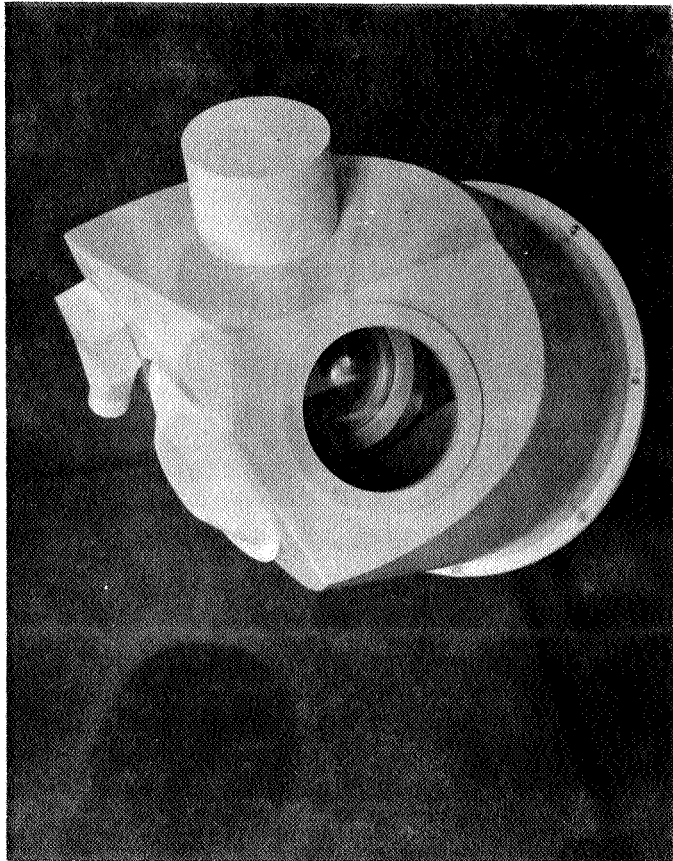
shows a full scale mock-up of the Mechanical Assembly. Figure 13 shows the relative location of equipments mounted on the turntable; Figure 14 shows the installation of the scanner and UV optics assemblies and the TEM/blower assembly for transferring heat from the flow cell pole TEM to the avionics air flow. Figure 15 shows overall key dimensions of the Mechanical Assembly. Figures 16 thru 21 show installation of the scanner and UV optics assemblies, the viewport and the TEM/blower assembly.
